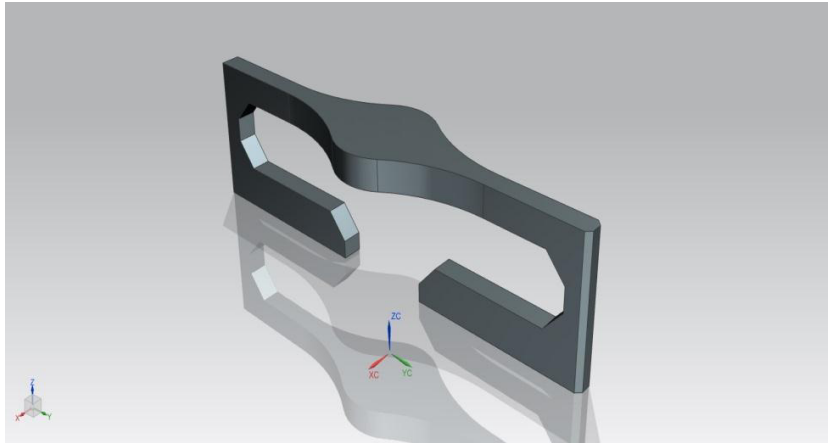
showing the arm which moves the tool holder in x and y axis direction
